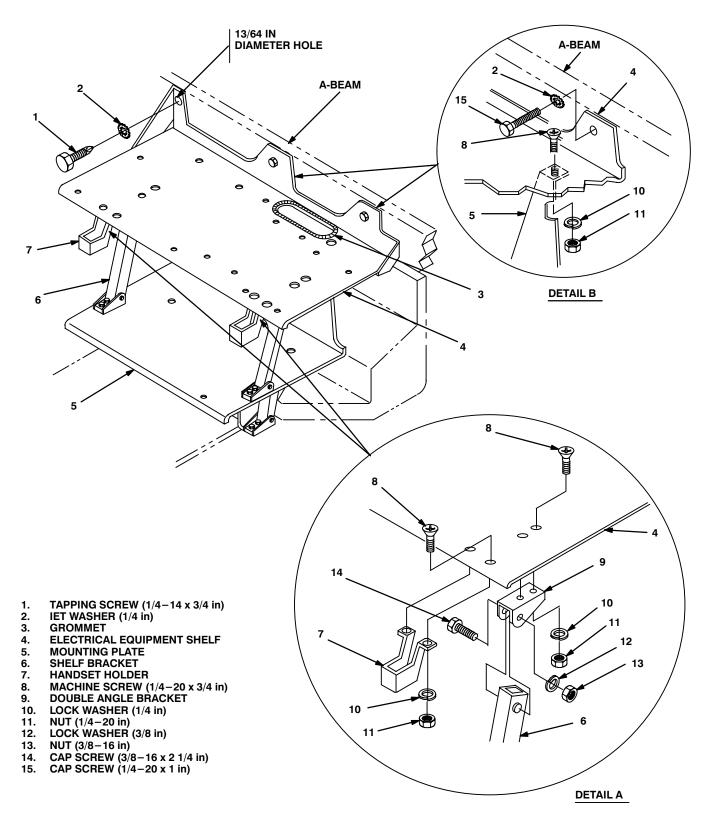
(2). Installation of Electrical Equipment Shelf: Electrical Equipment Shelf
